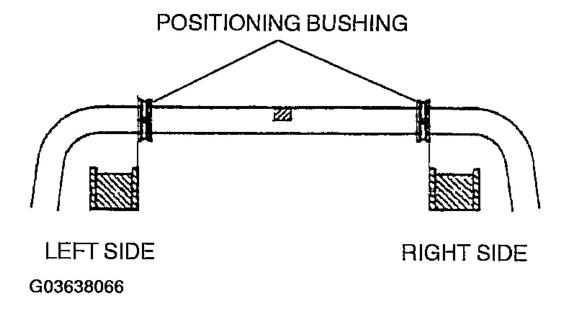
Aligning Bushing With Positioning Bushing On Stabilizer Courtesy of MAZDA MOTORS CORP.
